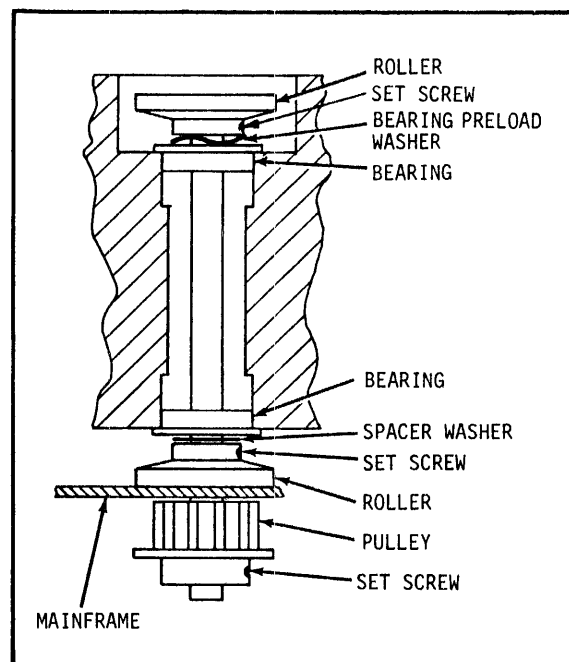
Roller Shaft Bearing Preload Adjustment
